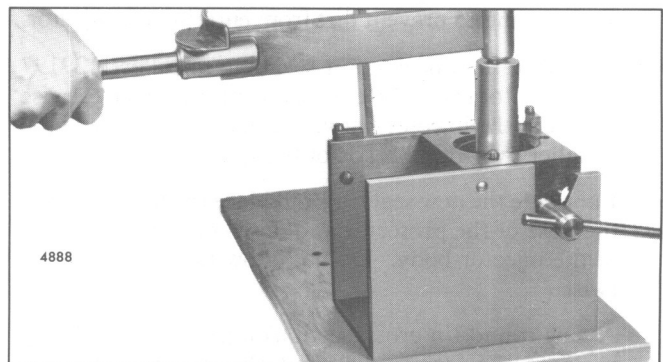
Tightening Injector Nut with Torque Wrench using Tool J 4983-01
